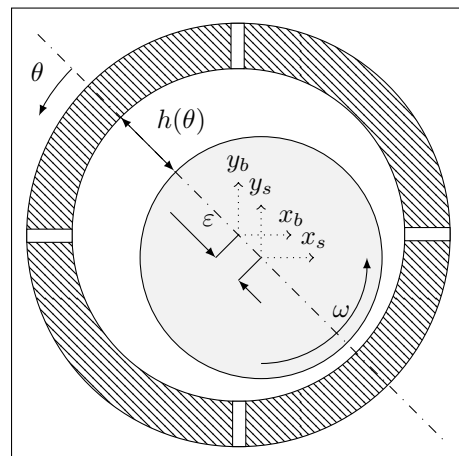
Schematic drawing of a hydrodynamic journal bearing.
